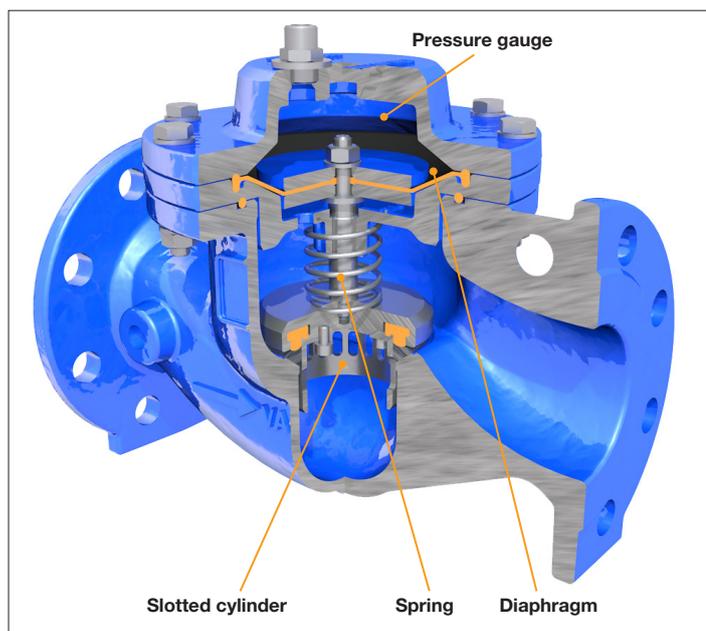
VAG PICO® M100 Pilot Operated Control Valve as pressure-reducing valve
